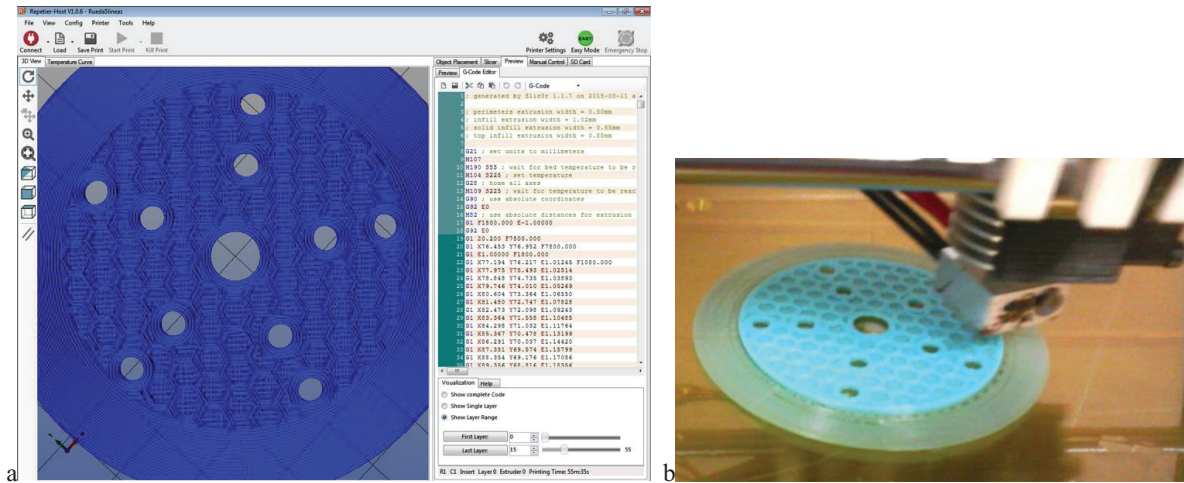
(a) G-code generated and deposited filament for layer 0 through layer 15; (b) actual piece during printing.
